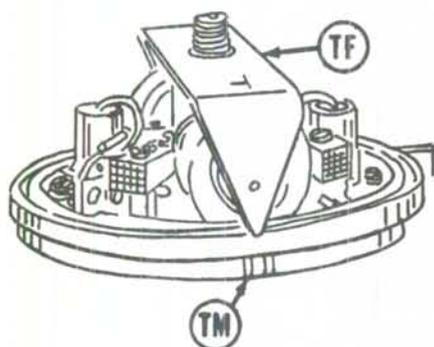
View of motor with timing fixture (TF) installed. Breaker points should just open when pointer is centered between timing marks (TM) on armature plate.
